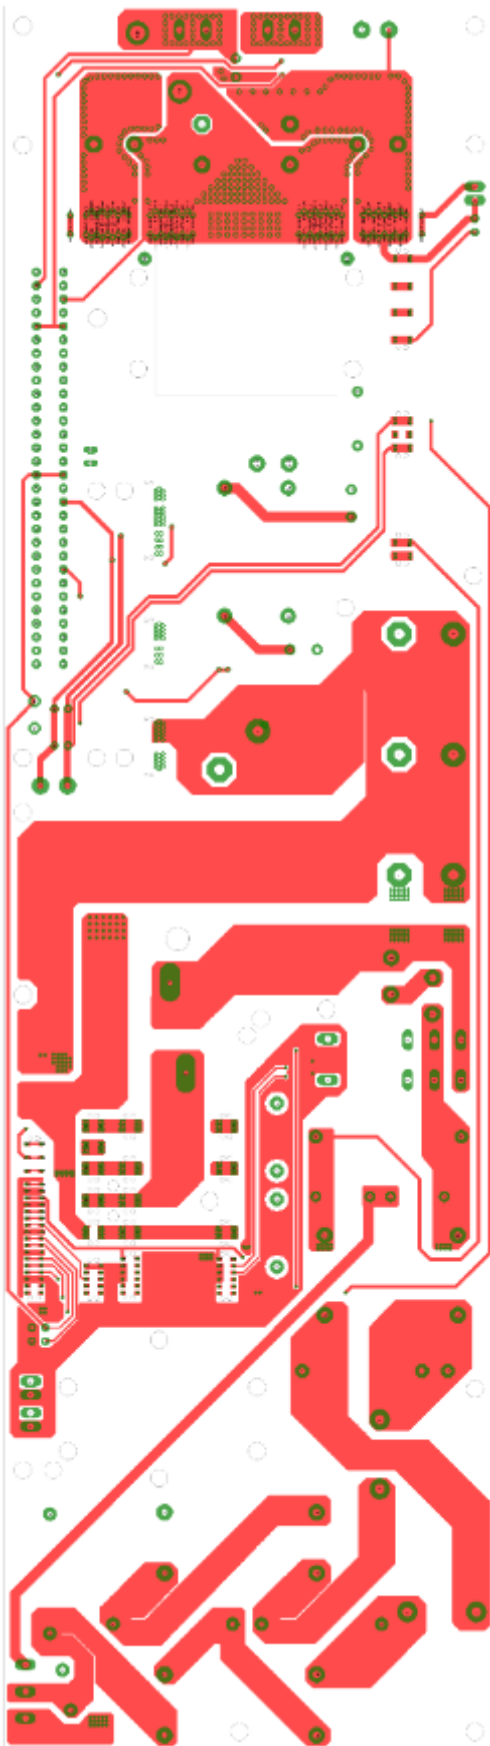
Top Layer PCB Layout and Assembly Plan of the MAIN BOARD
